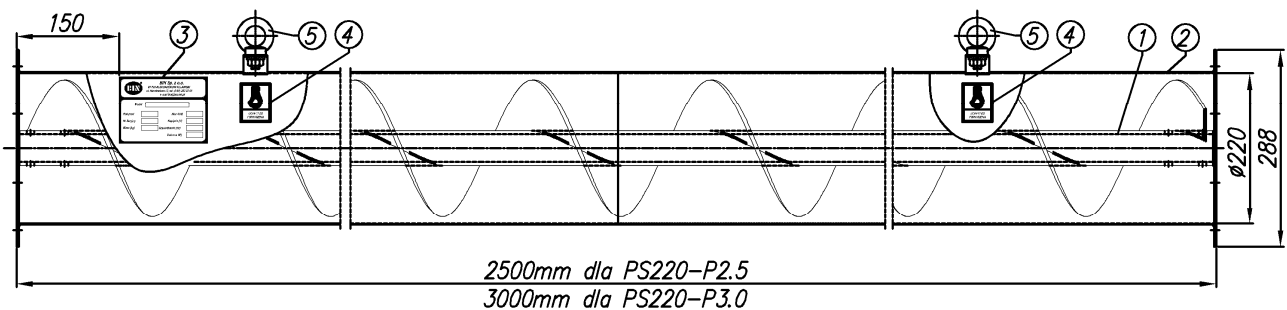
PS220-P2.5- screw conveyor  $\varnothing\varnothing 220$  – 2,5m screw conveyor extension
